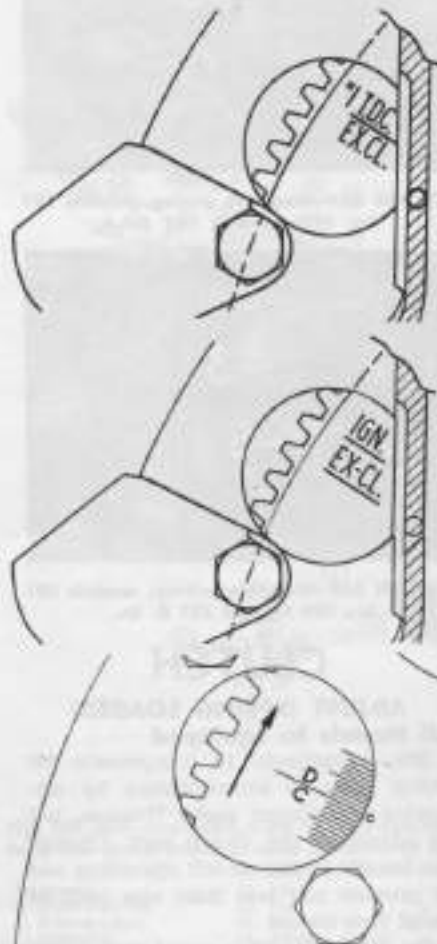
Typical flywheel markings as found on Massey-Harris tractors equipped with Massey-Harris or Continental engines.
